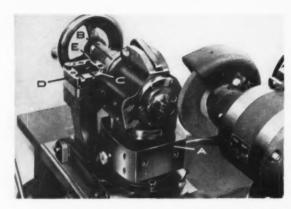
A "Royal Oak" universal form-relieving fixture Fig. 2. Fixture shown in Fig. 1 set up for combination set up for radial relief only
